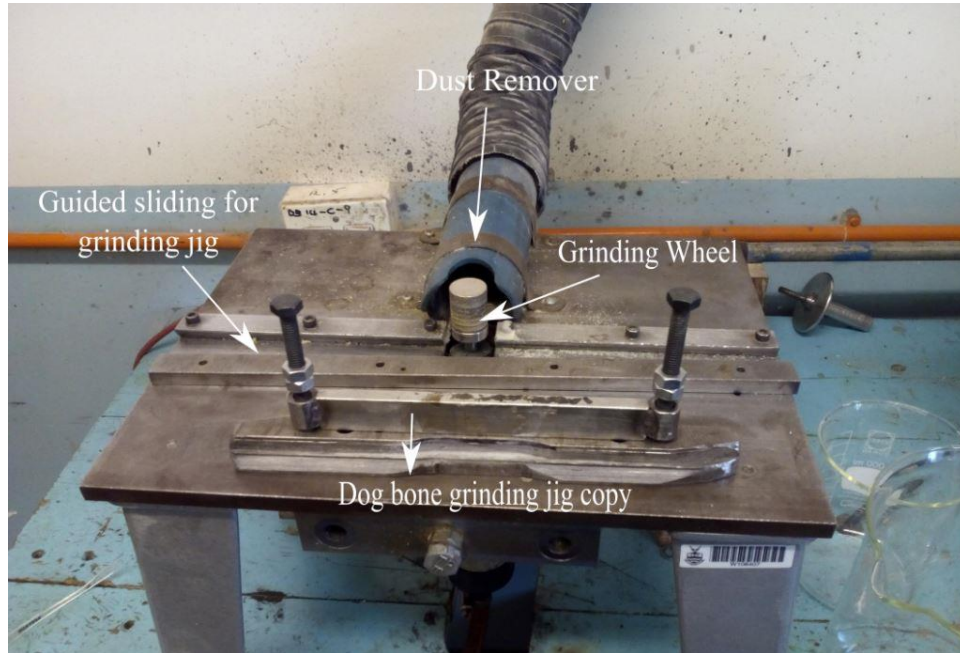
TensilKut grinder and dog bone copy jig used to cut the tensile specimens
